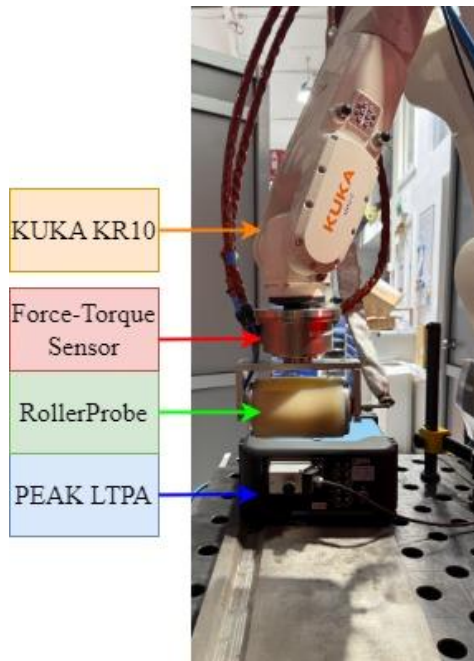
KUKA KR10 inspection manipulator with the complete end-effector assembly. From top to bottom: the KUKA KR10 arm, ATI force-torque sensor (red), RollerProbe phased array transducer (green), and PEAK-NDT LTPA acquisition unit (blue).
